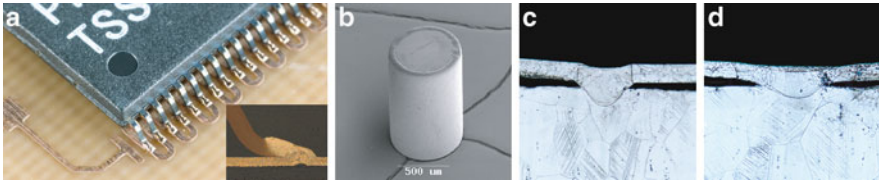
Typical micro welding examples: (a) pulsed laser weld of IC to PCB (copper alloy), (b) fiber laser weld of tube to cap for sealing of a medical implant (radio seed therapy), wall thickness $50\ \mu\text{m}$, tube diameter $0.8\ \text{mm}$ (titanium), (c) cross section of fiber laser weld and (d) cross section of pulsed laser weld of membrane welding for sealing in a sensor application, membrane thickness $20\ \mu\text{m}$ (high-grade steel)
